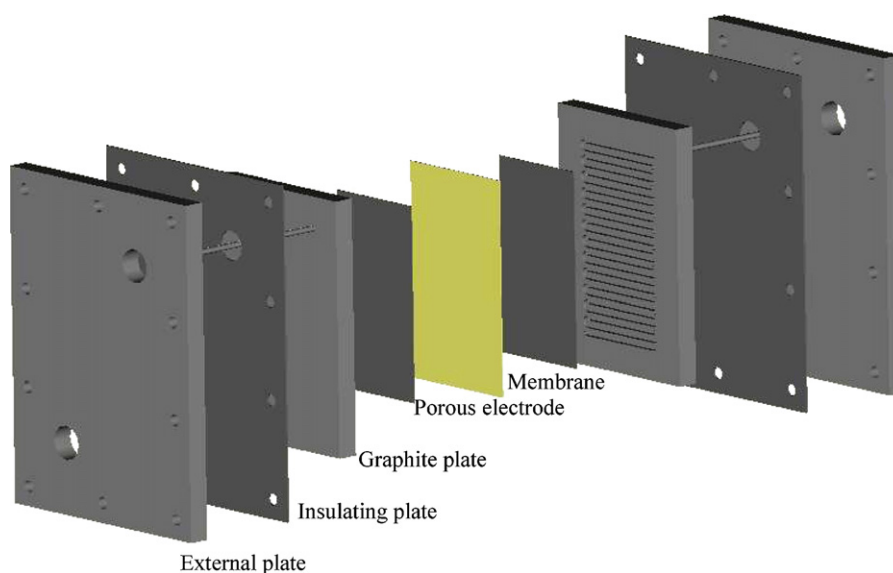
Exploded view of the assembled purification/compression PEM-cell.
